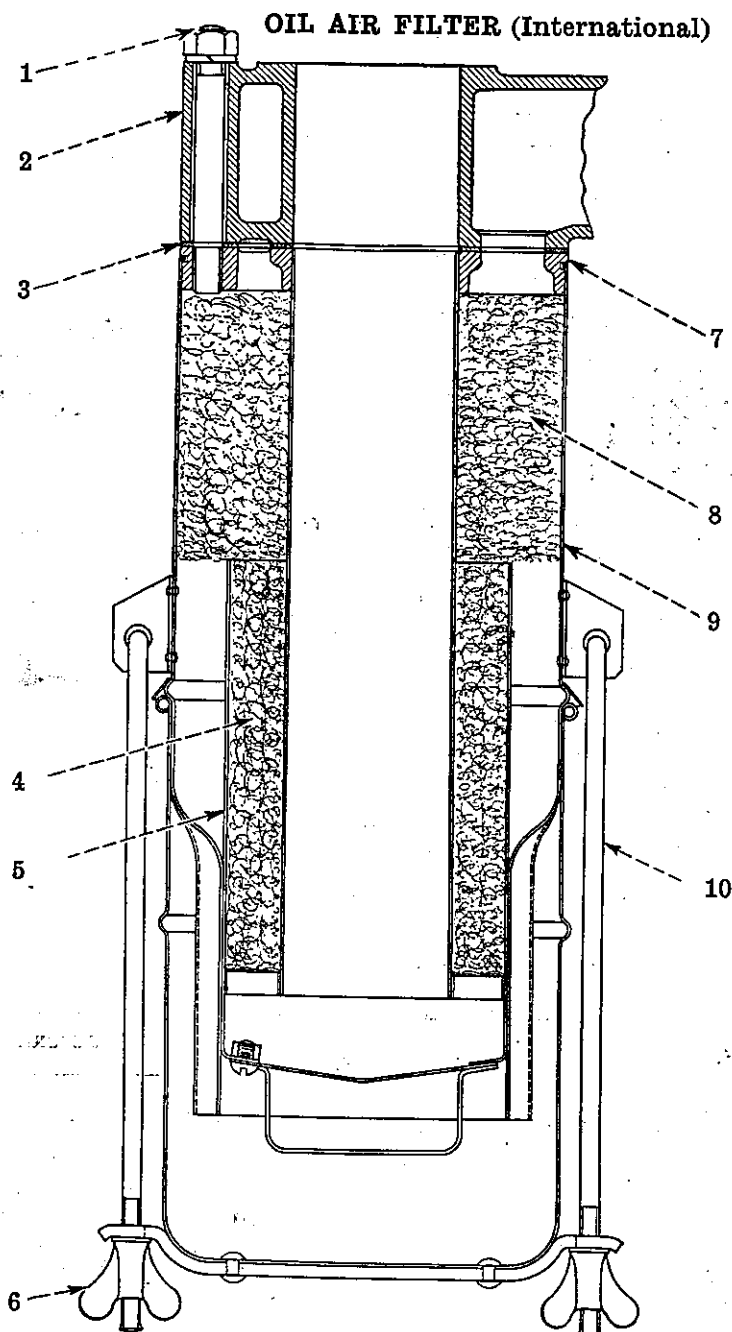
Illustration No. 67—Oil air filter (16466DAX) (sectional view).
